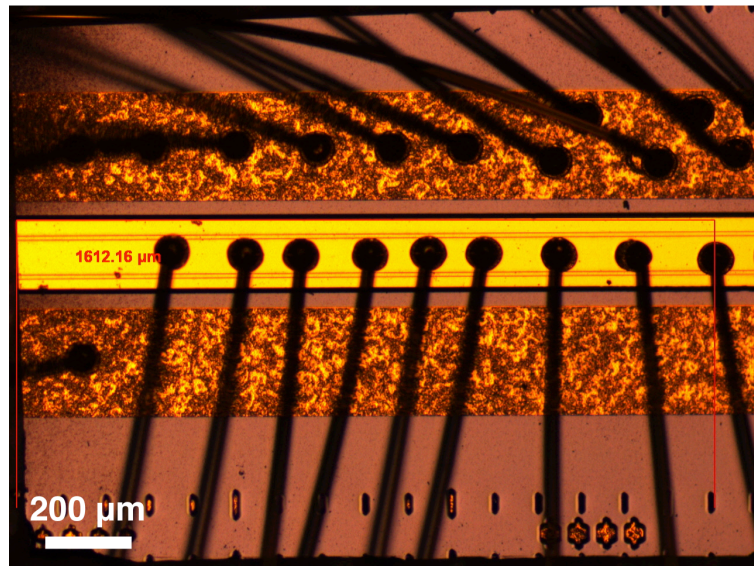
Optical microscopy of a QCL device after packaging and wire bonding.
